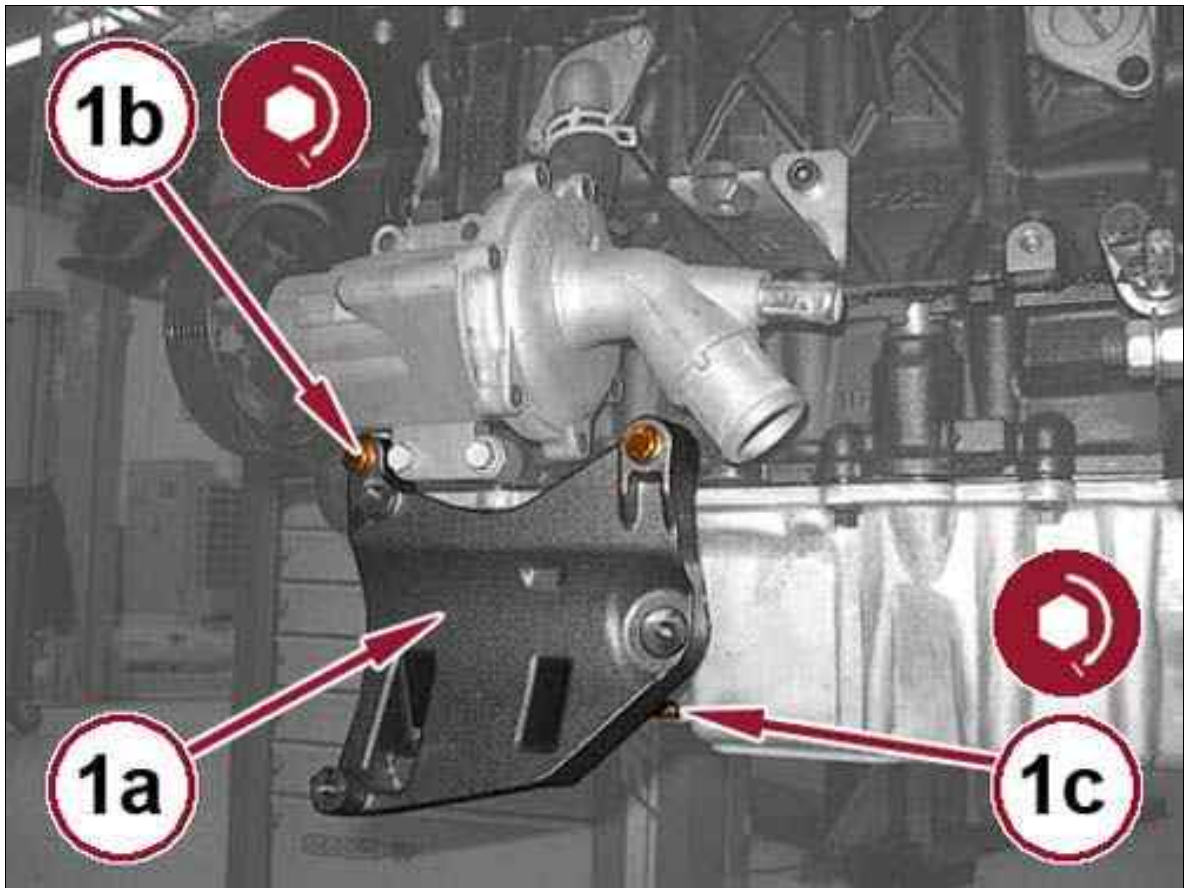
Water Delivery Pipe To Engine Block, Water Pump Assembly & Bolts
